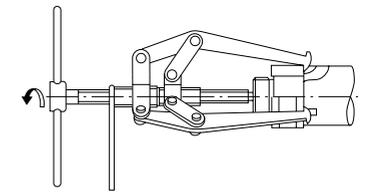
Removal of Inner Ring Using Withdrawal Tool (2)
